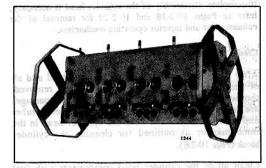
Cylinder Head Mounted on Holding Plates (J 3087-01)
